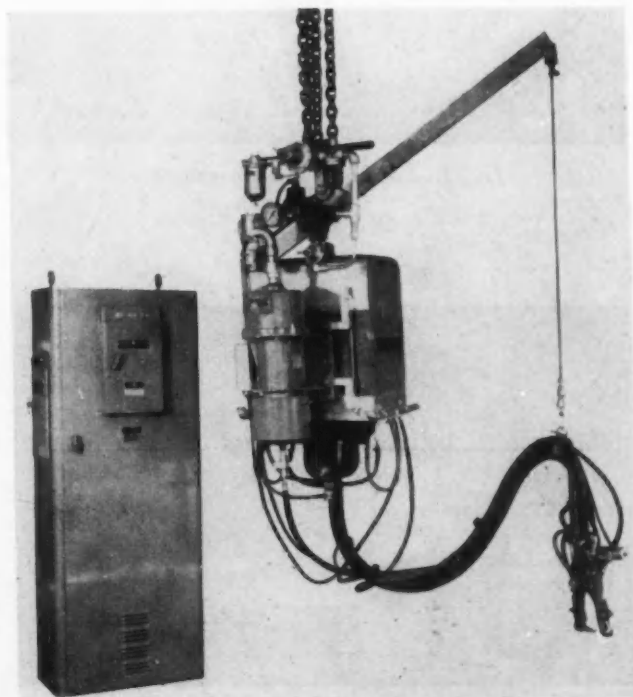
Welding and control equipment selected for the ticklish job of welding aluminum
